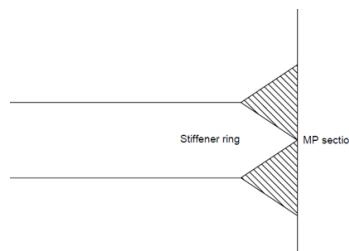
sketch of the weld between the stiffener ring and the MP section
